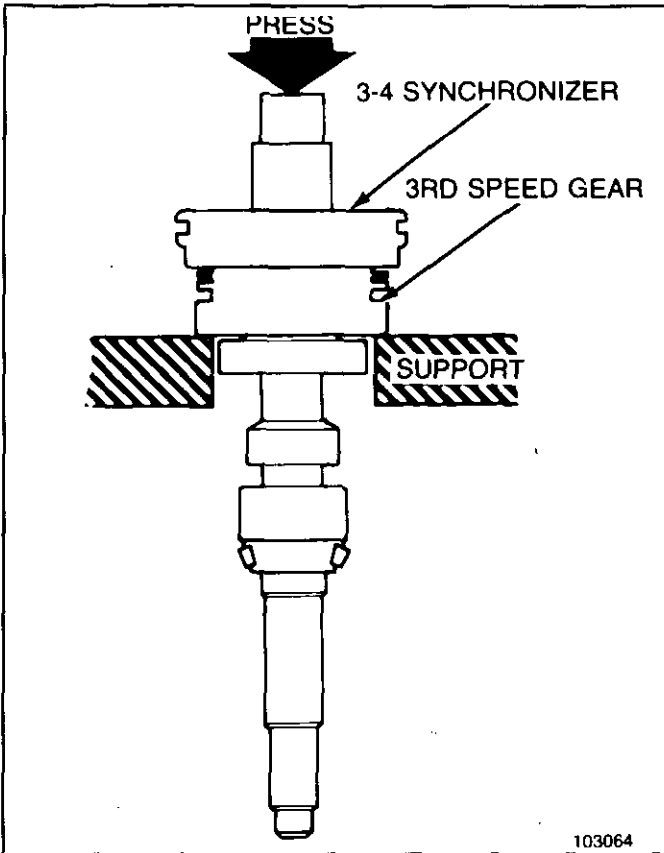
Removing 3-4 Synch. and 3rd Gear(Input)
